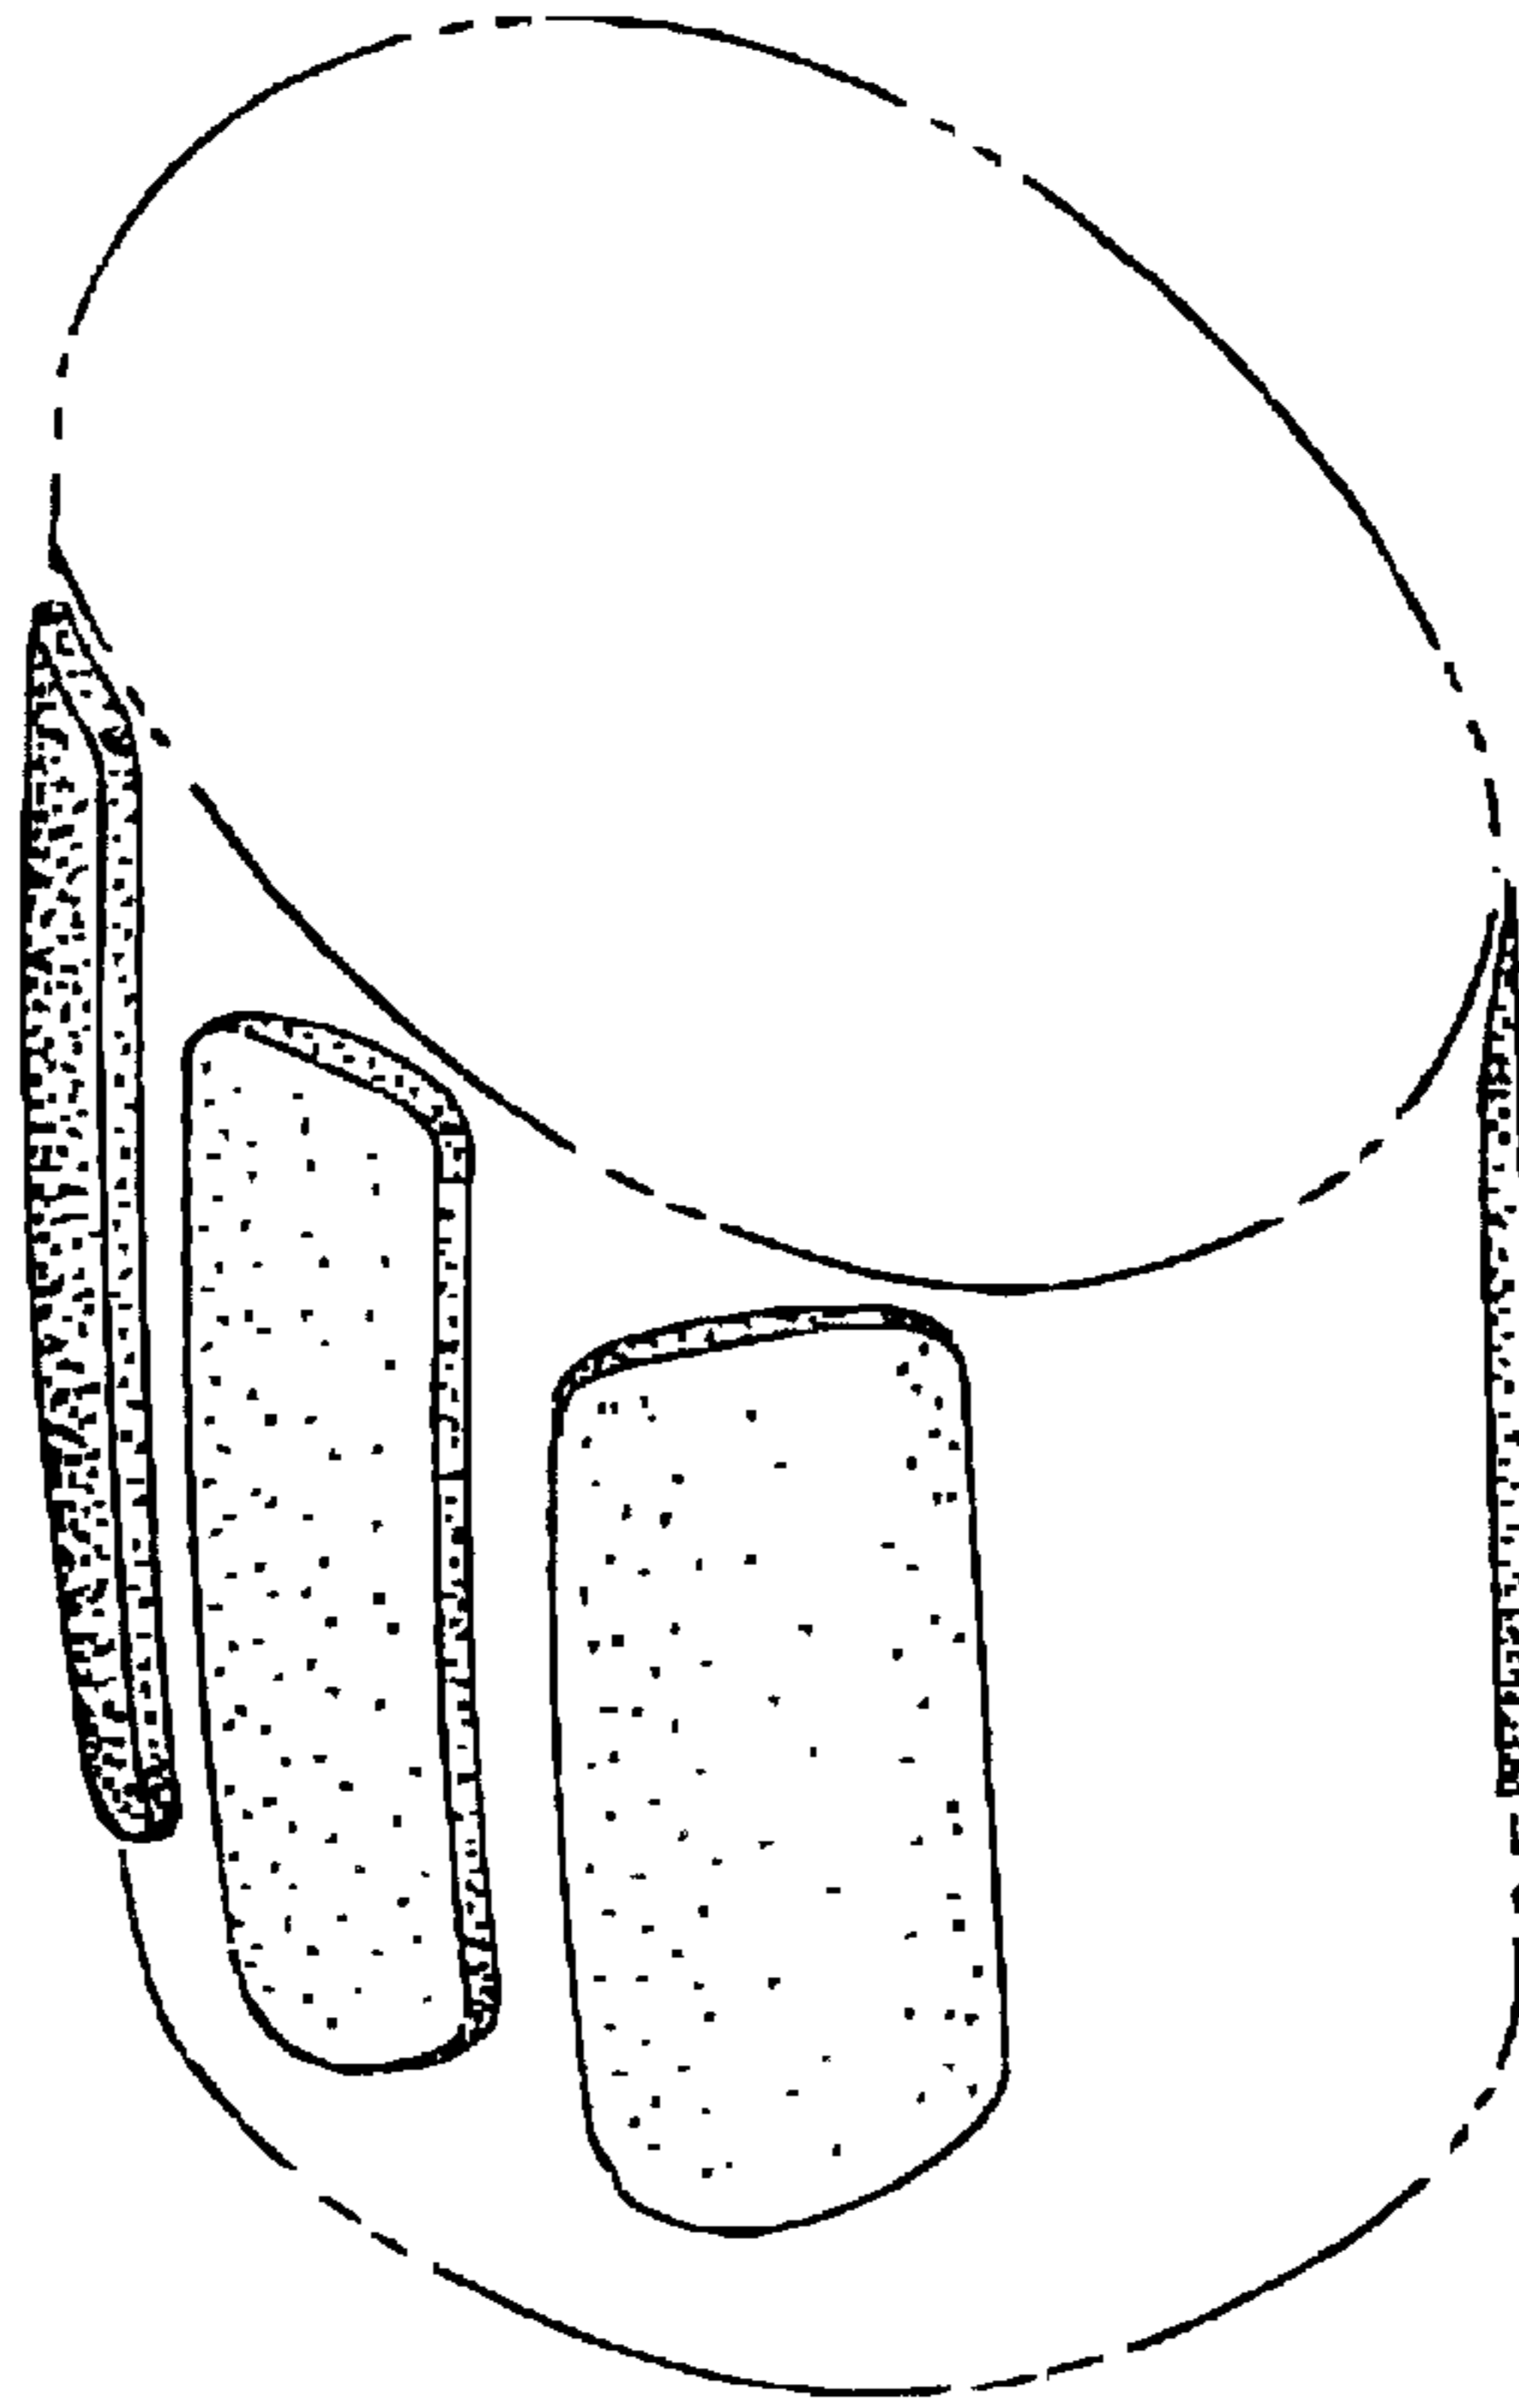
is a top view of the third embodiment of gripping pads shown in the environment of the third embodiment of the power tool handle portion shown in FIG. 15; and,
